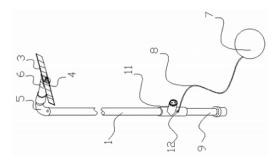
CN203327599 (U): "Flower and fruit thinning machine" [29]
